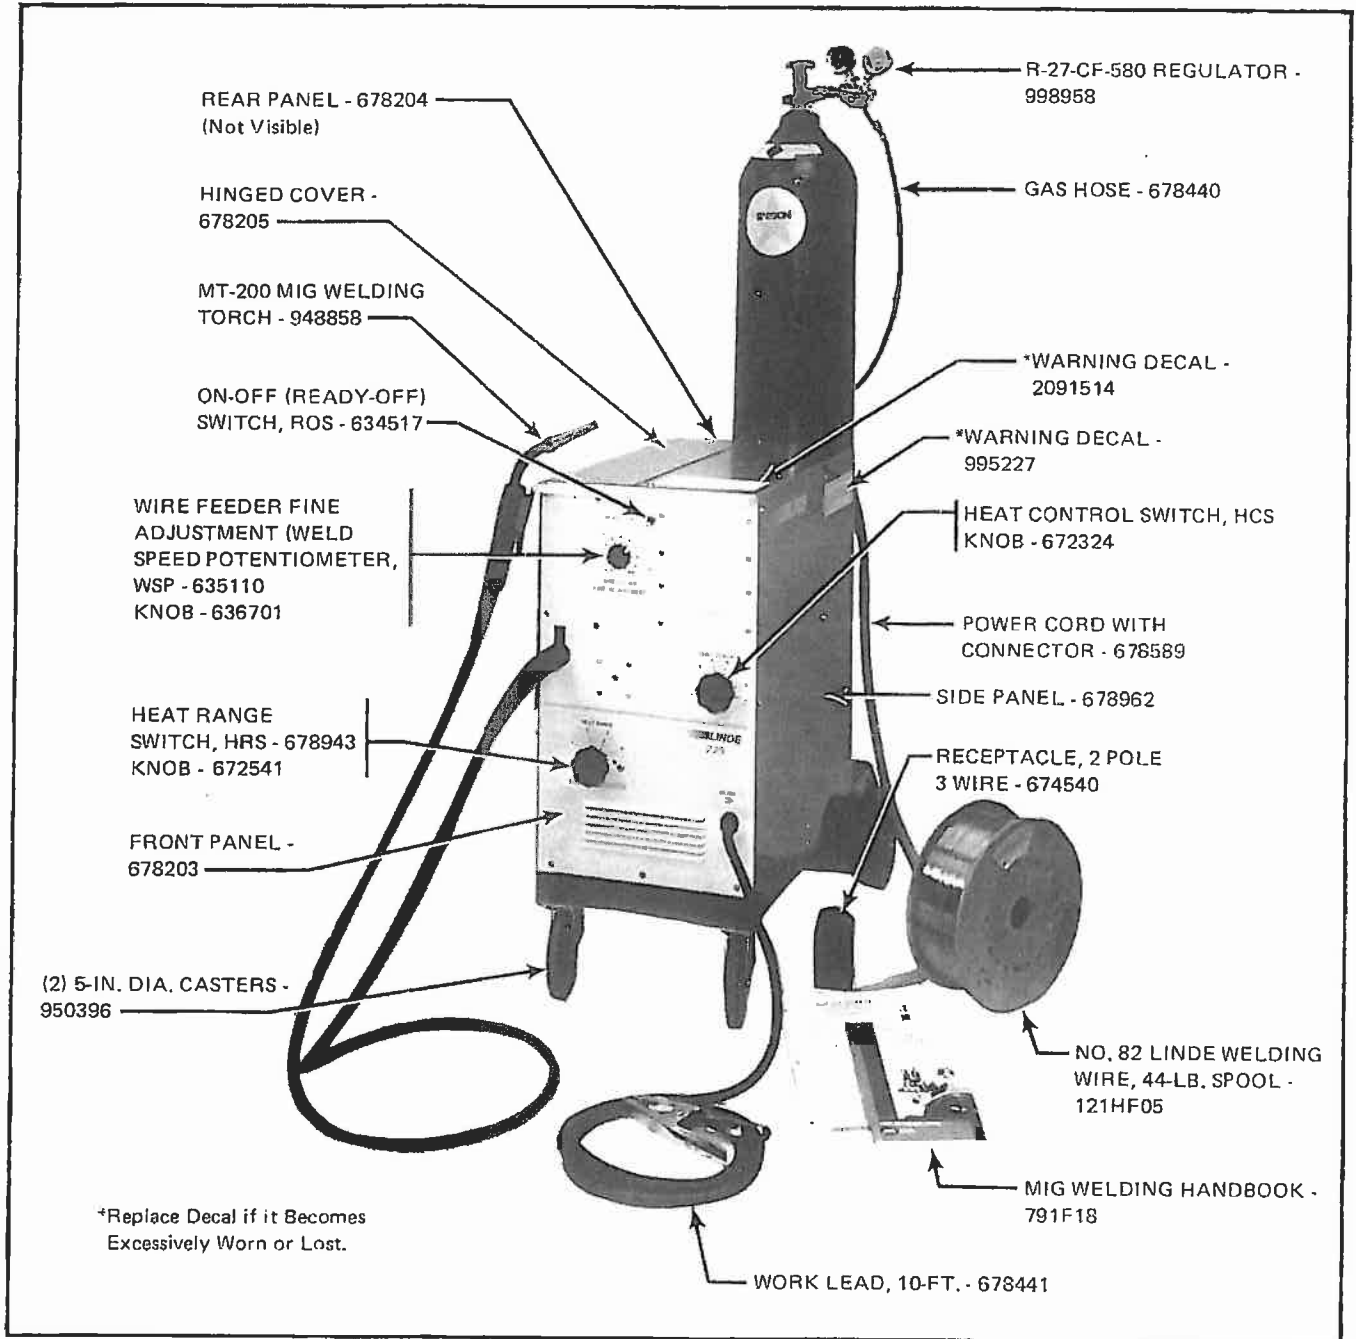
Front View, Migmaster LINDE 225, P/N 600507
